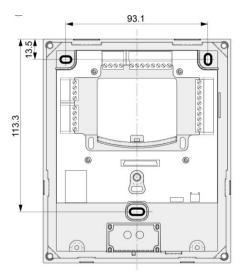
Surface mounting without flush-mounted box (measurements in mm)
